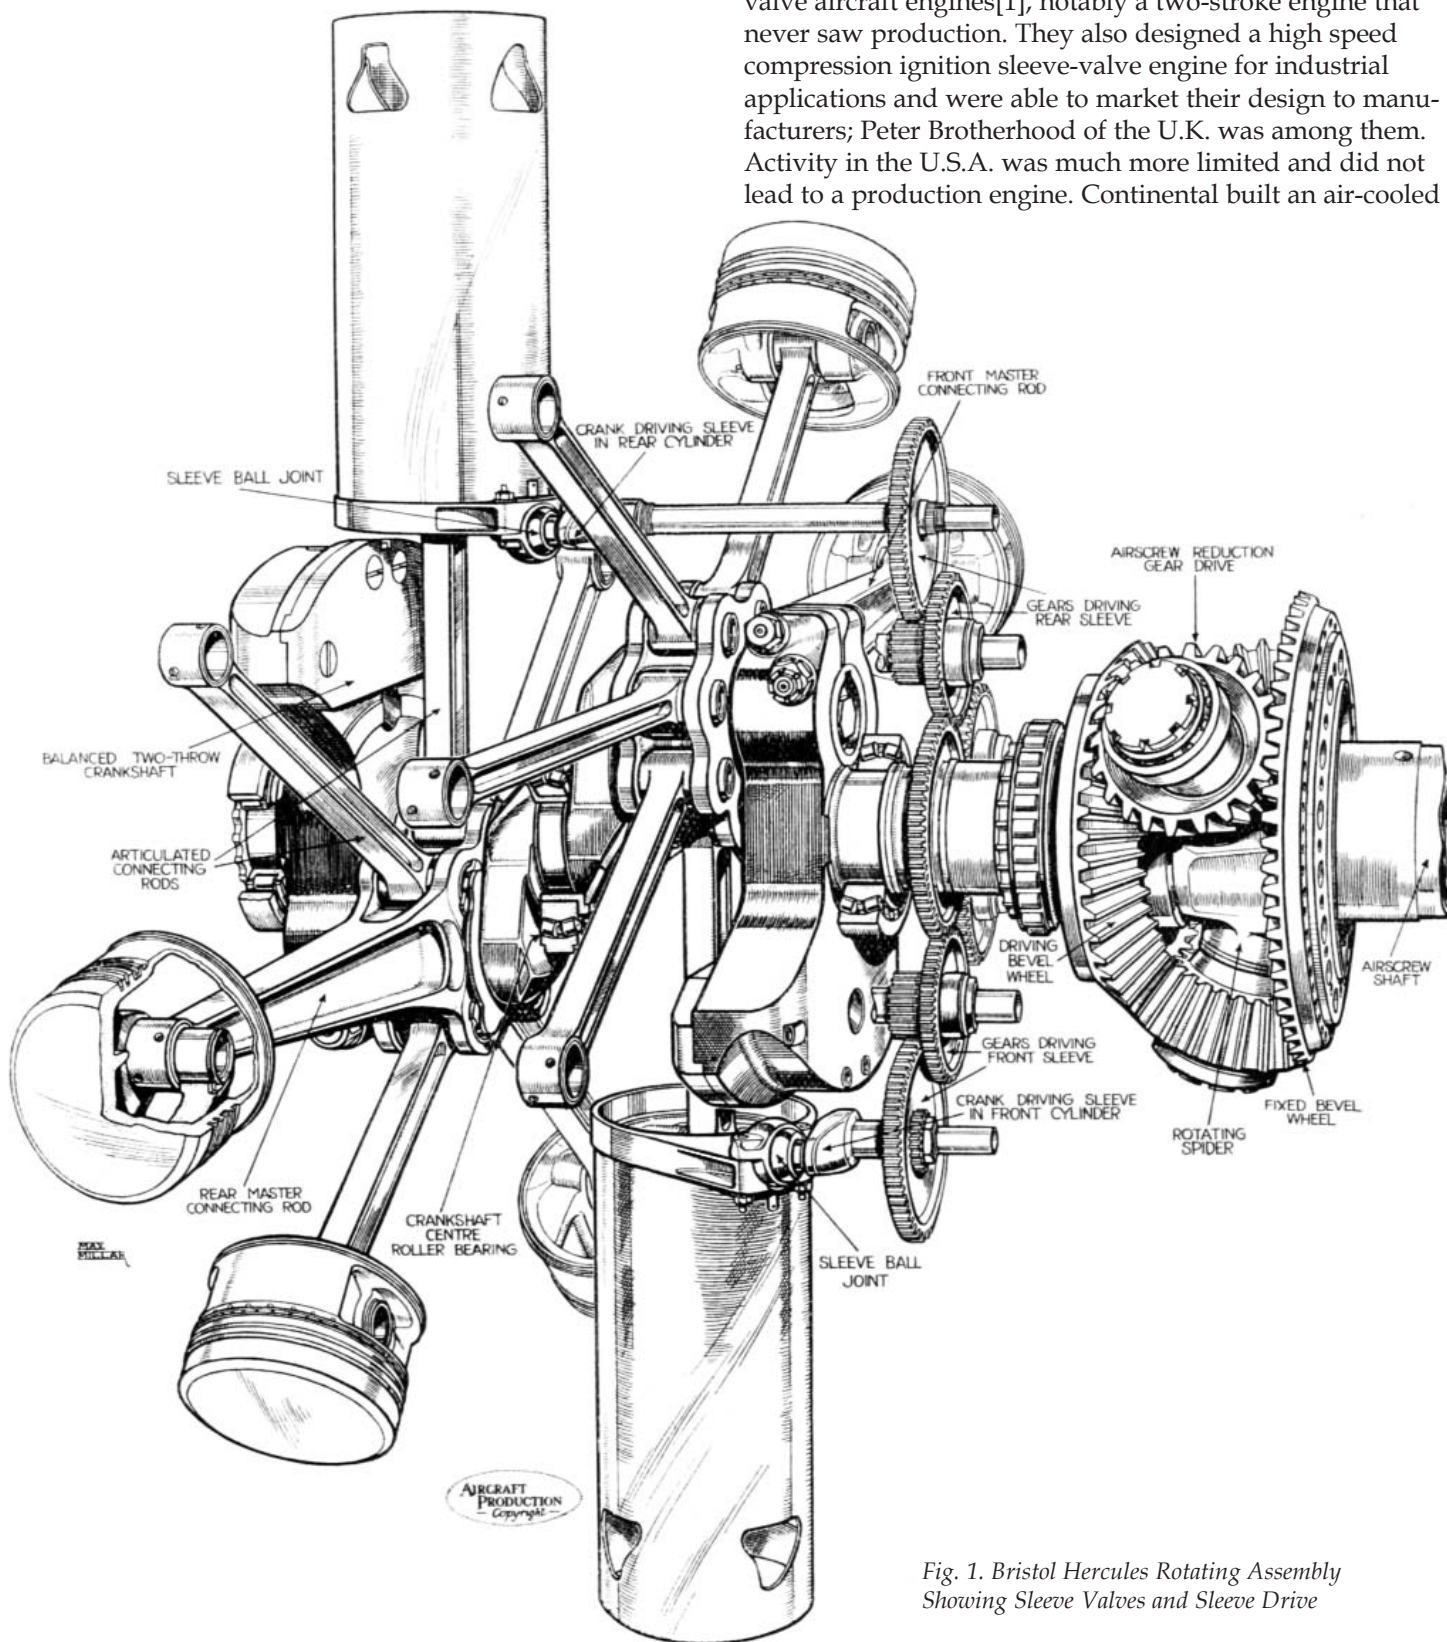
Bristol Hercules Rotating Assembly Showing Sleeve Valves and Sleeve Drive
